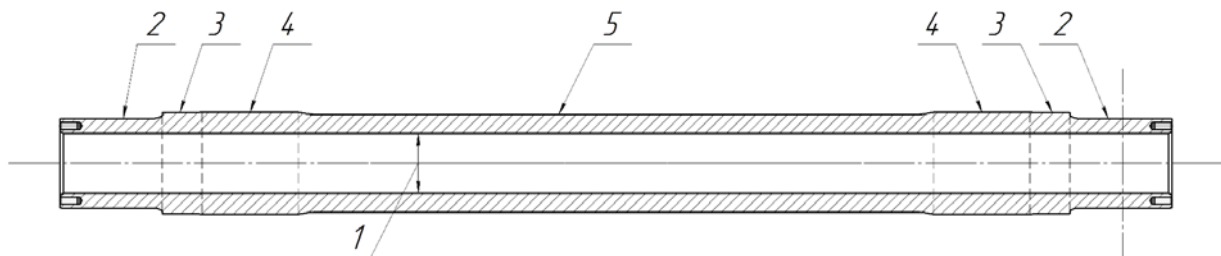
Wheelset axle with a cavity of uniform cross section:
